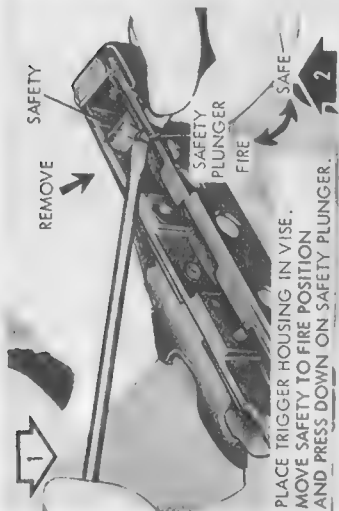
Disassembly/assembly of trigger mechanism grip group.
